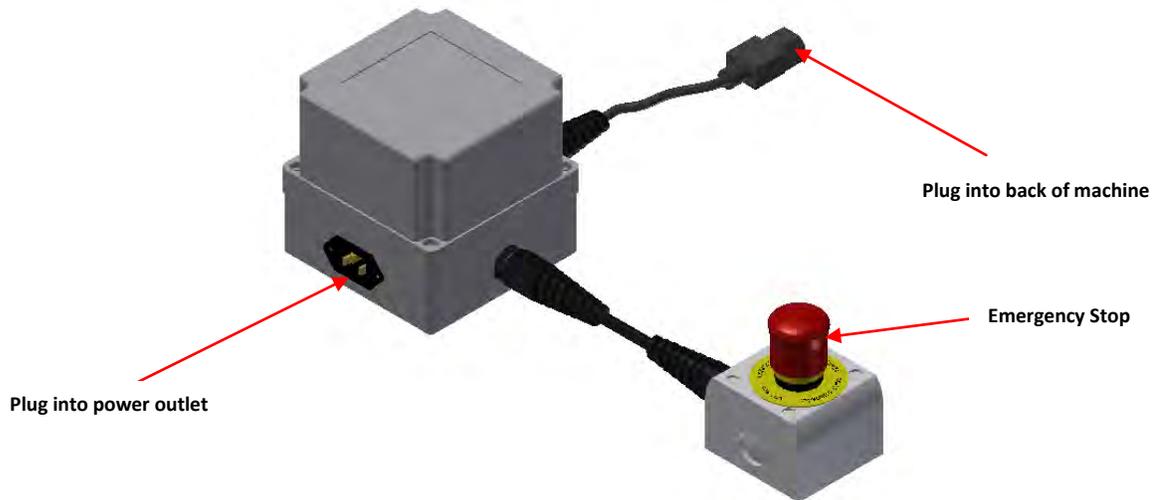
Remote Emergency Stop (E-Stop) assembly
